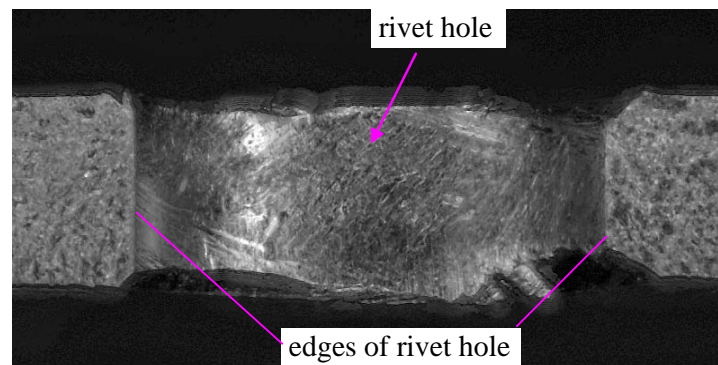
Fatigue cracking from a rivet hole in a coupon
